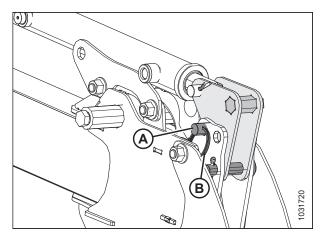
Fore-Aft Cylinder Adjustment Type 1 – Aft Position
